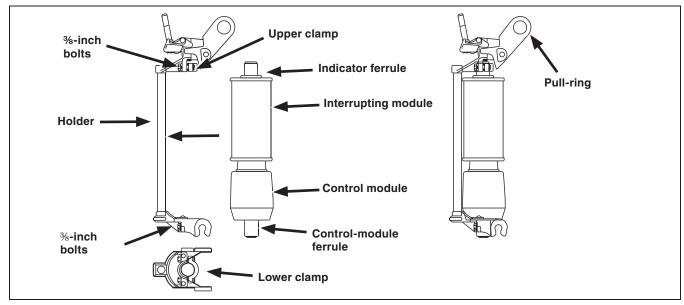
Installing the control module and interrupting module assembly in holders• for S&C Fault Filter Electronic Power Fuse Mountings with Uni-Rupter® Interrupters.
